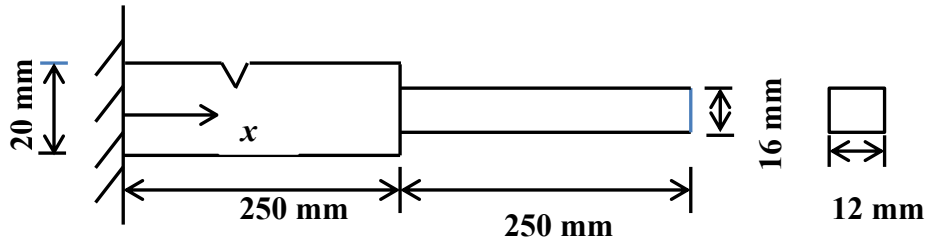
Sketch of Single Cracked Two Step Cantilever Beam
